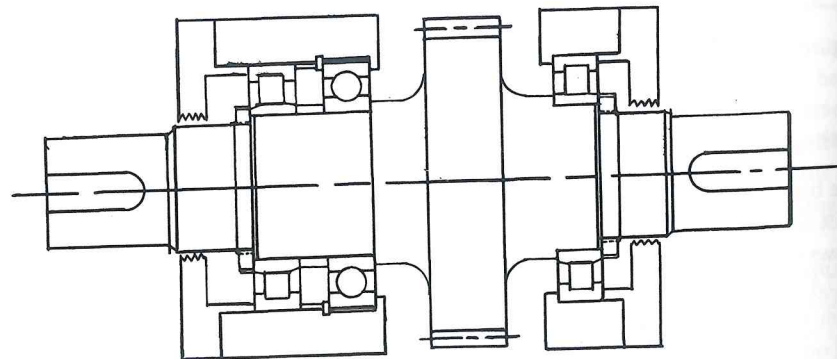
Mounting configuration for combined radial and thrust loads.
